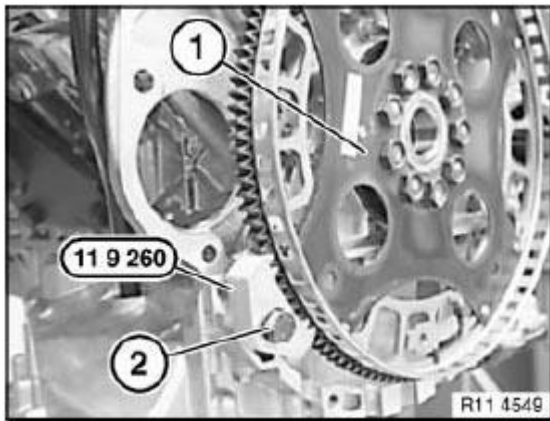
Special Tool (11 9 260), Flywheel And Transmission Bolt
